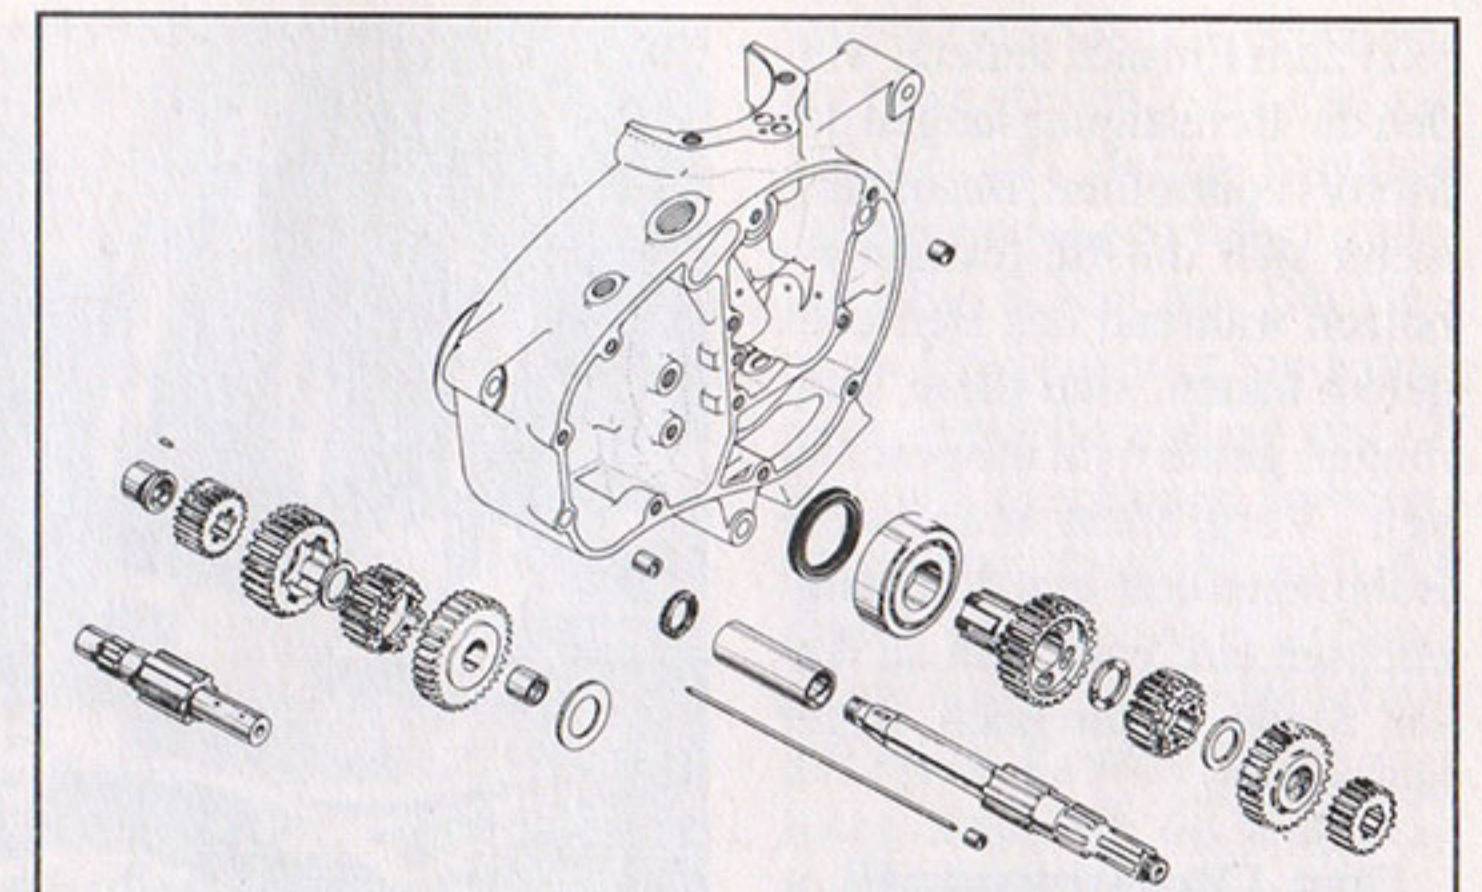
Exploded view of earlier 250 and 350 Star gearbox cluster
